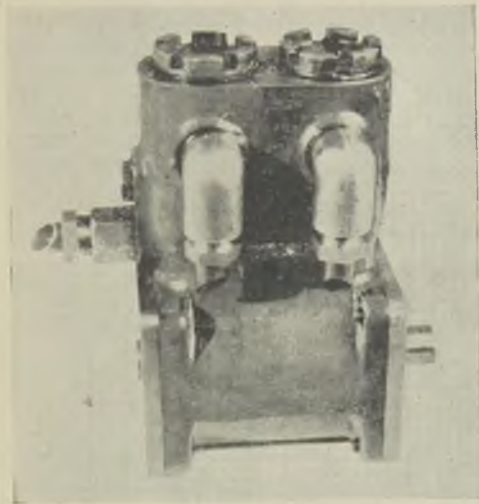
VALVE GEAR FOR HYDRAULIC SAWING MACHINE, CAST IN "NI-TENSYL."
